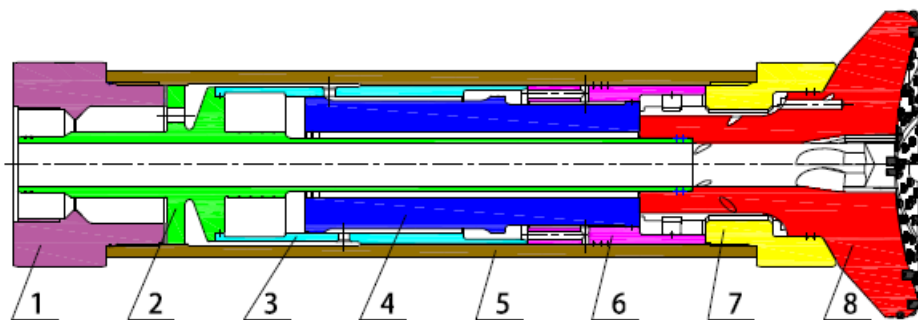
4 - RC drill bit assembly; 1: upper connection; 2: center tube; 3: inner casing; 4: piston; 5: outer tube; 6: spacer bush; 7: splined hub; and 8: drill bit (Adapted by Zhang et al., 2019)
